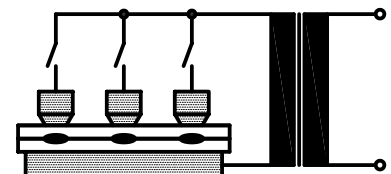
Parallel and series spot welding — Indirect welding
